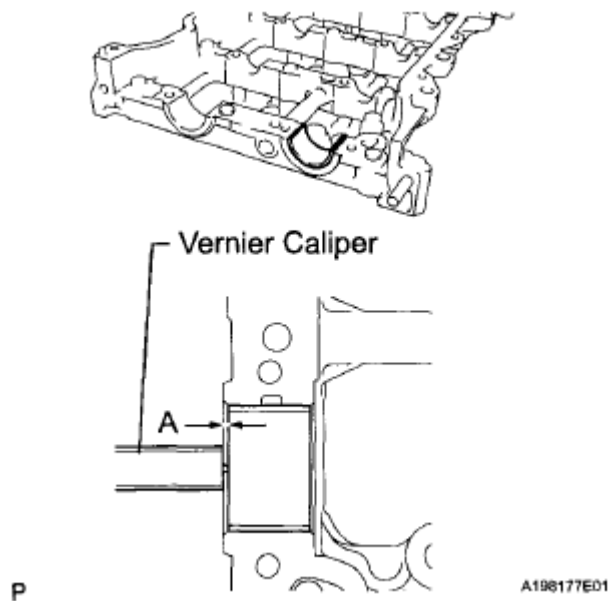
Measuring Distance Between Camshaft Housing Edge And Camshaft Bearing Edge
